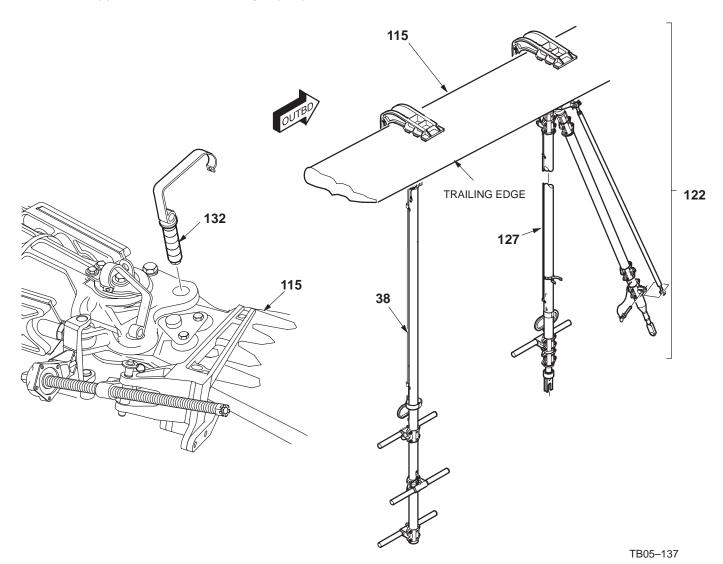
Aircraft Blade Pin from R/H FWD Blade Leading Edge
